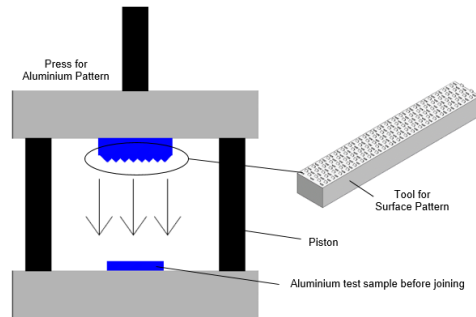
Pressing process for having patterned surface on aluminium samples
